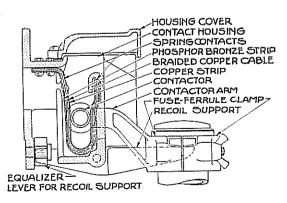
Showing Details of the well housed contact Clip of the "Pole-Pull" Fuse Mounting
